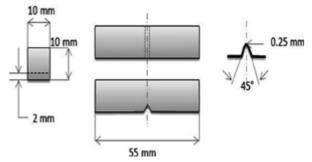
Specimen for Charpy Impact test with Standard Dimension
